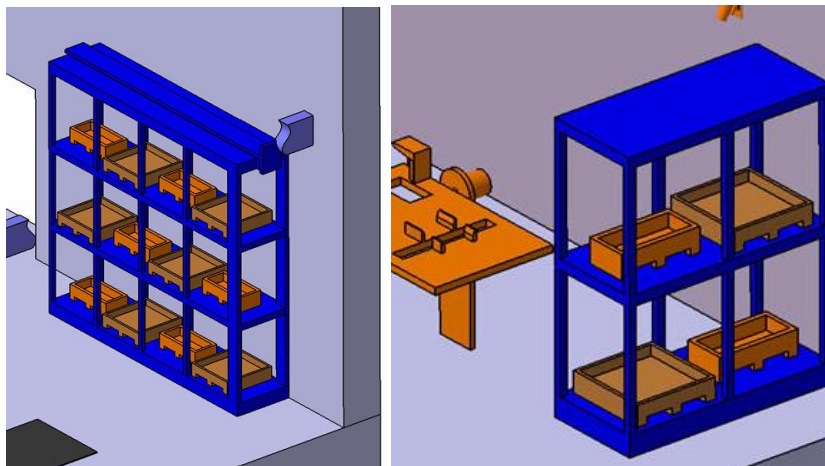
LEFT: AC tool box storage shelf and RIGHT: TMHC tool box storage shelf[4]
